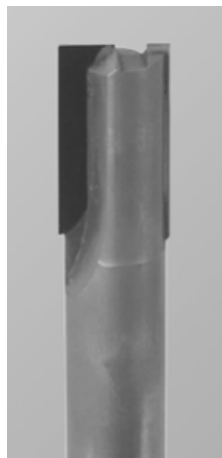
Guhring CFRP 2 edge PCD mill
